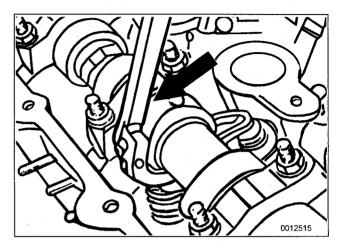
BMW special tool no. 11 5 130 (arrow) being used to depress valve stem to remove rocker arm.
